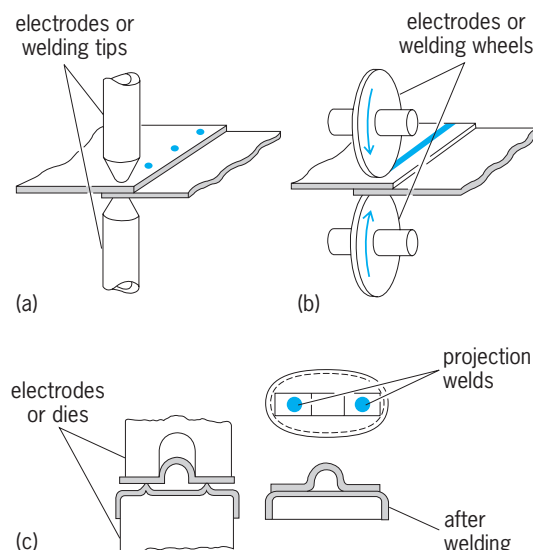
Three typical resistance welding methods. (a) Spot welding. (b) Seam welding. (c) Projection welding. (After W. H. Kearns, ed., *Welding Handbook*, 7th ed., vol. 3, American Welding Society, 1976)
